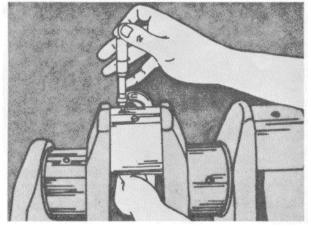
C-15. Measure the Crankshaft Connecting Rod Journal
